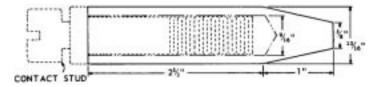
Dimensions of sleeve for installing steel spring on stationary contact assembly on reclosers below serial no. 1001
